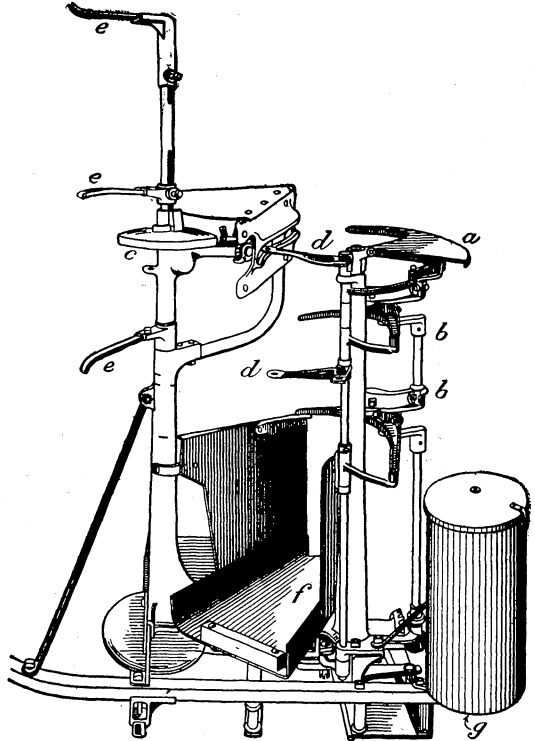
Binder attachment: *a*, Needle; *bb*, packers; *c*, knotter cam; *dd*, compressor hook; *eee*, discharge arms; *f*, butt table or butt shoe; *g*, twine cam.
